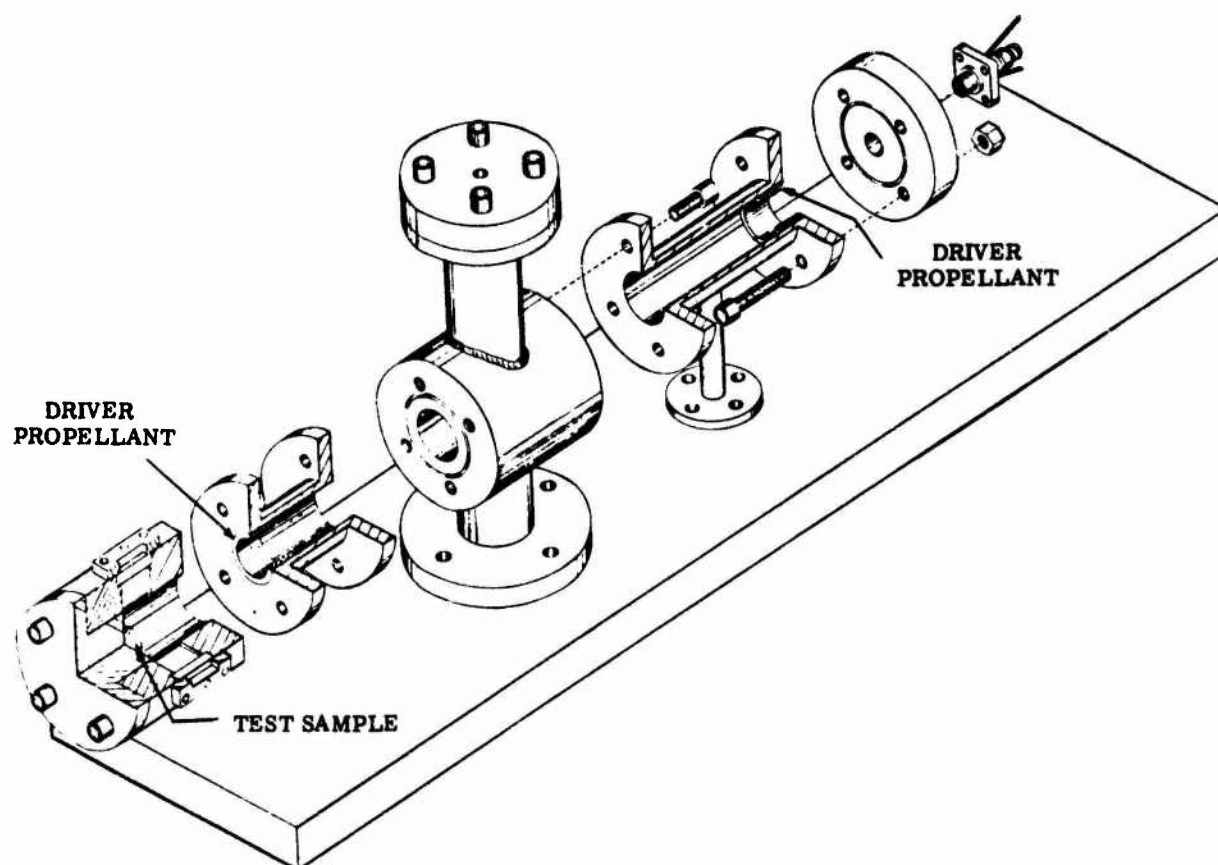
ASSEMBLY VIEW OF OSCILLATOR
